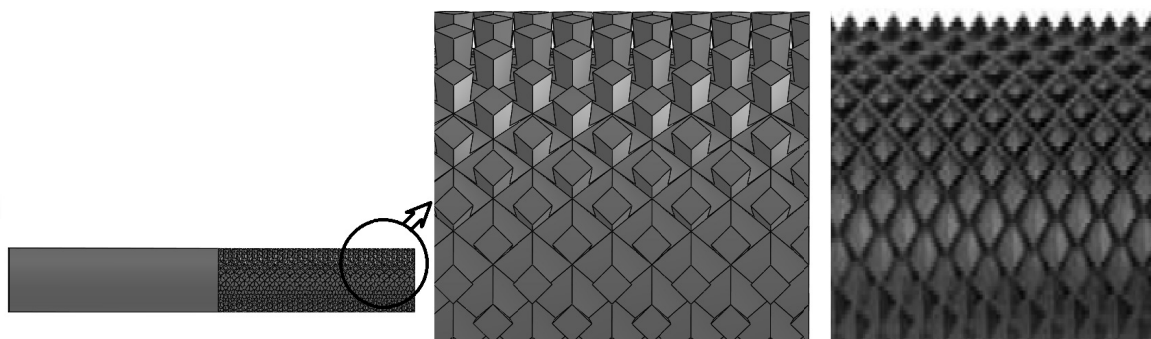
Milling cutter with rectangular shape tooth in the tool reference plane
